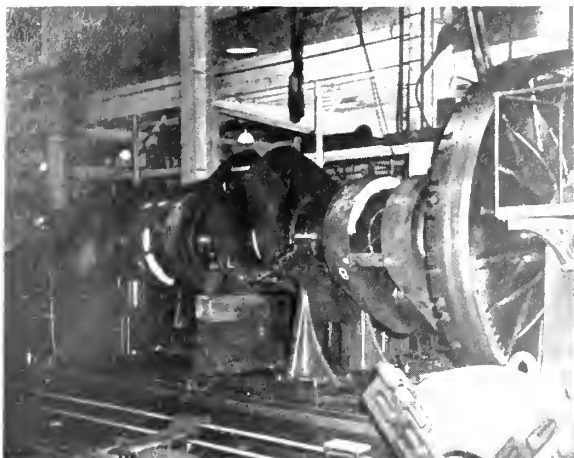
The shaft on the 125" x 60' lathe, after being shipped to the San Francisco Yard's machine shop, where the survey and inspections were made, after which the journal pins were undercut, as far as was practicable, close to the webs. The final cut was accomplished with a burning torch. Incidentally, this lathe is one of the largest on the West Coast.
